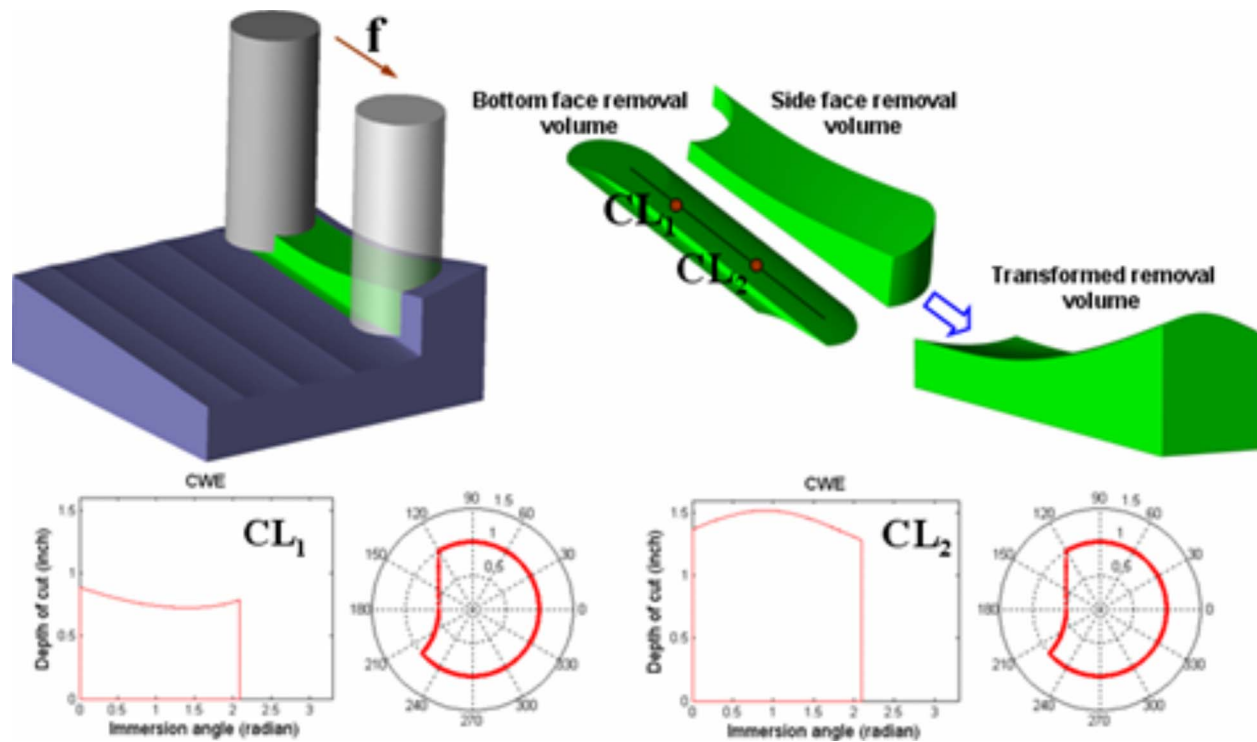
CWEs for flat end mill performing a linear three-axis move
